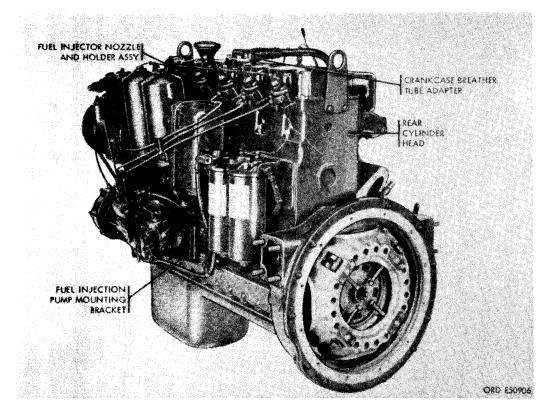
EARLY MODEL LDS -427-2 ENGINE ASSEMBLY - 3/4 LEFT REAR VIEW.
